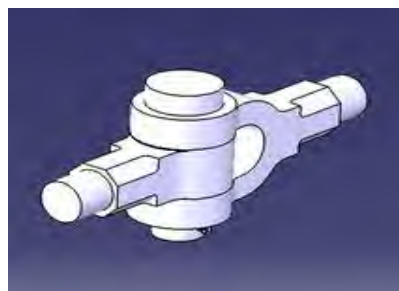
Example of drawing using CATIA. *(grabcad.com)
